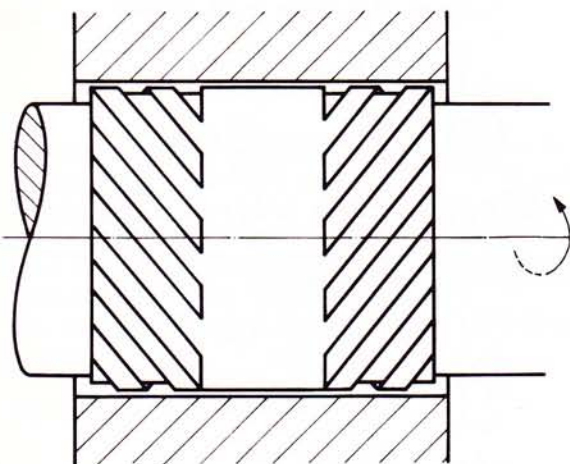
Journal bearing, partly grooved; symmetrical pattern
